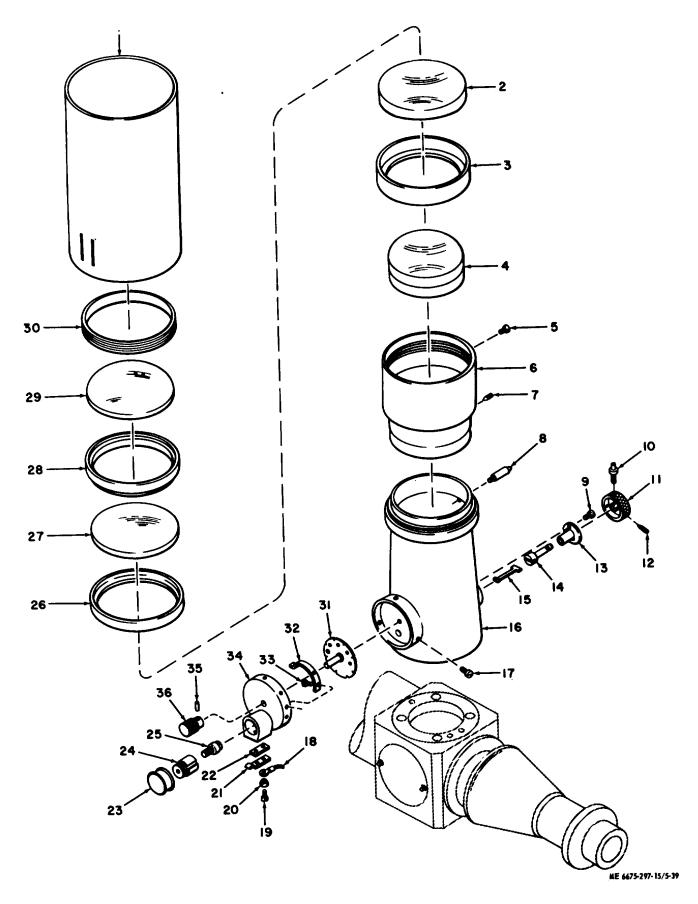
Telescope shade, objective assembly, tube, diaphragm and mirror; disassembly and reassembly.
